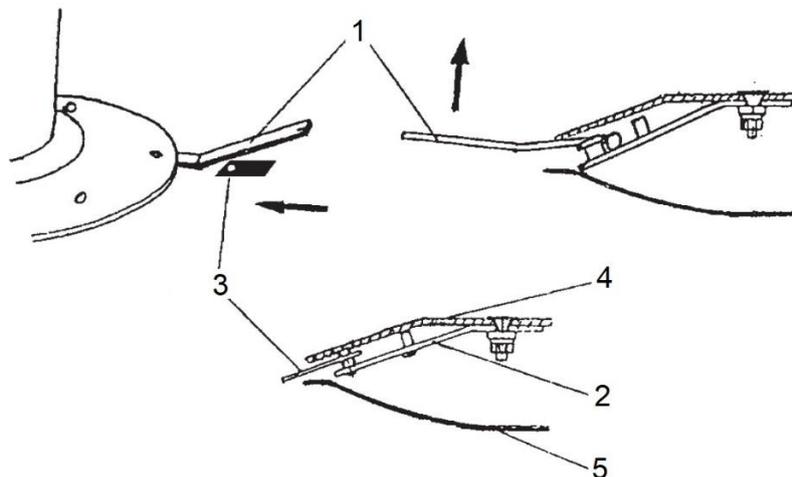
Installation of knives: 1 - special wrench, 2 - knife holder, 3 - knife, 4 - working disc, 5 - sliding disc.
